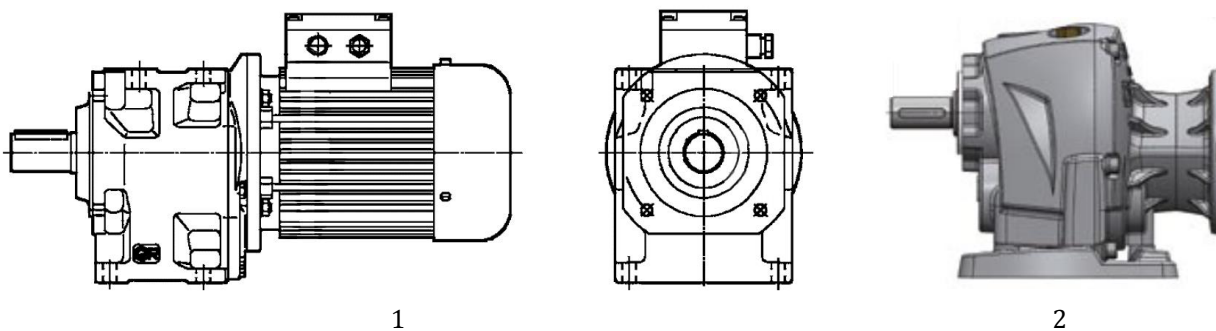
Characteristic solutions of three-stage universal gear reducers manufactured in universal housing for two-stage and three-stage gearbox, provided in variant with feet and/or flange: (1) Rossi and (2) Robus.
